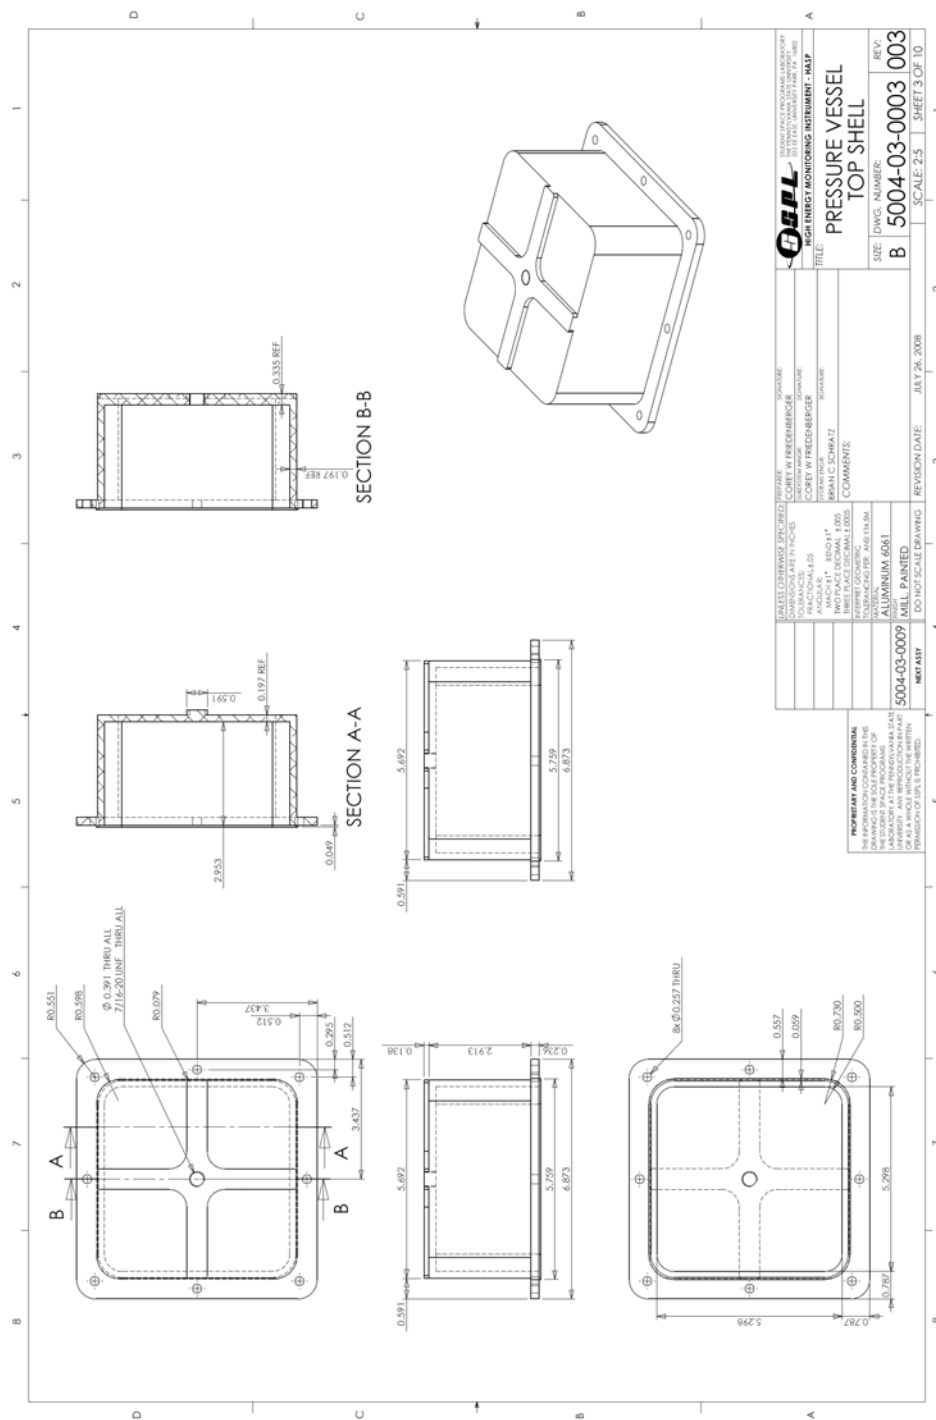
Mechanical Drawing: Pressure Vessel Top Shell
